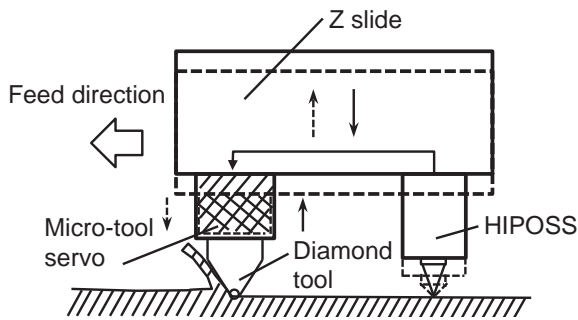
Principle of workpiece-referred form accuracy control [10].
